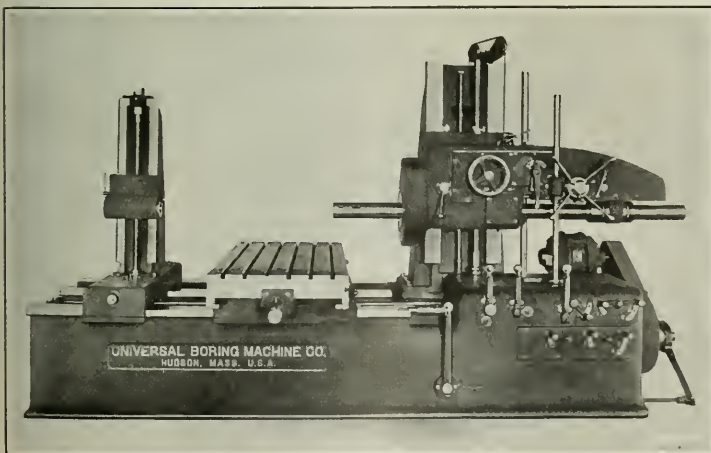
"Tri-way" Horizontal Boring Machine developed by the Universal Boring Machine Co.
